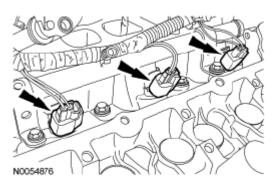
Locating Ground Cable Bolts Courtesy of FORD MOTOR CO.
